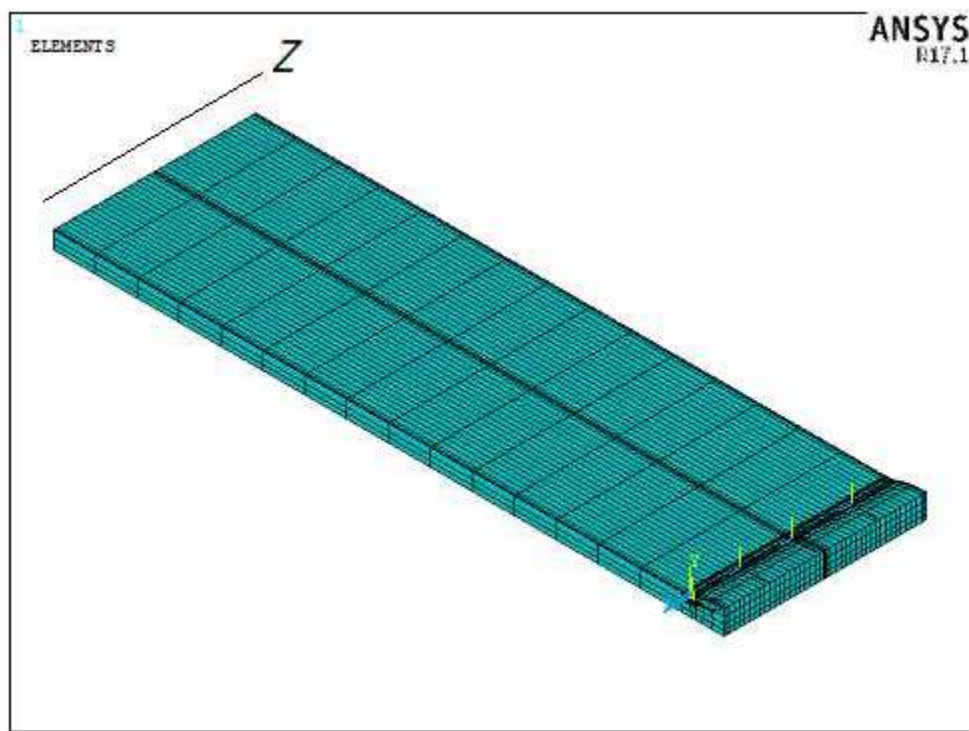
WELDING DESIGN POSSIBILITY
